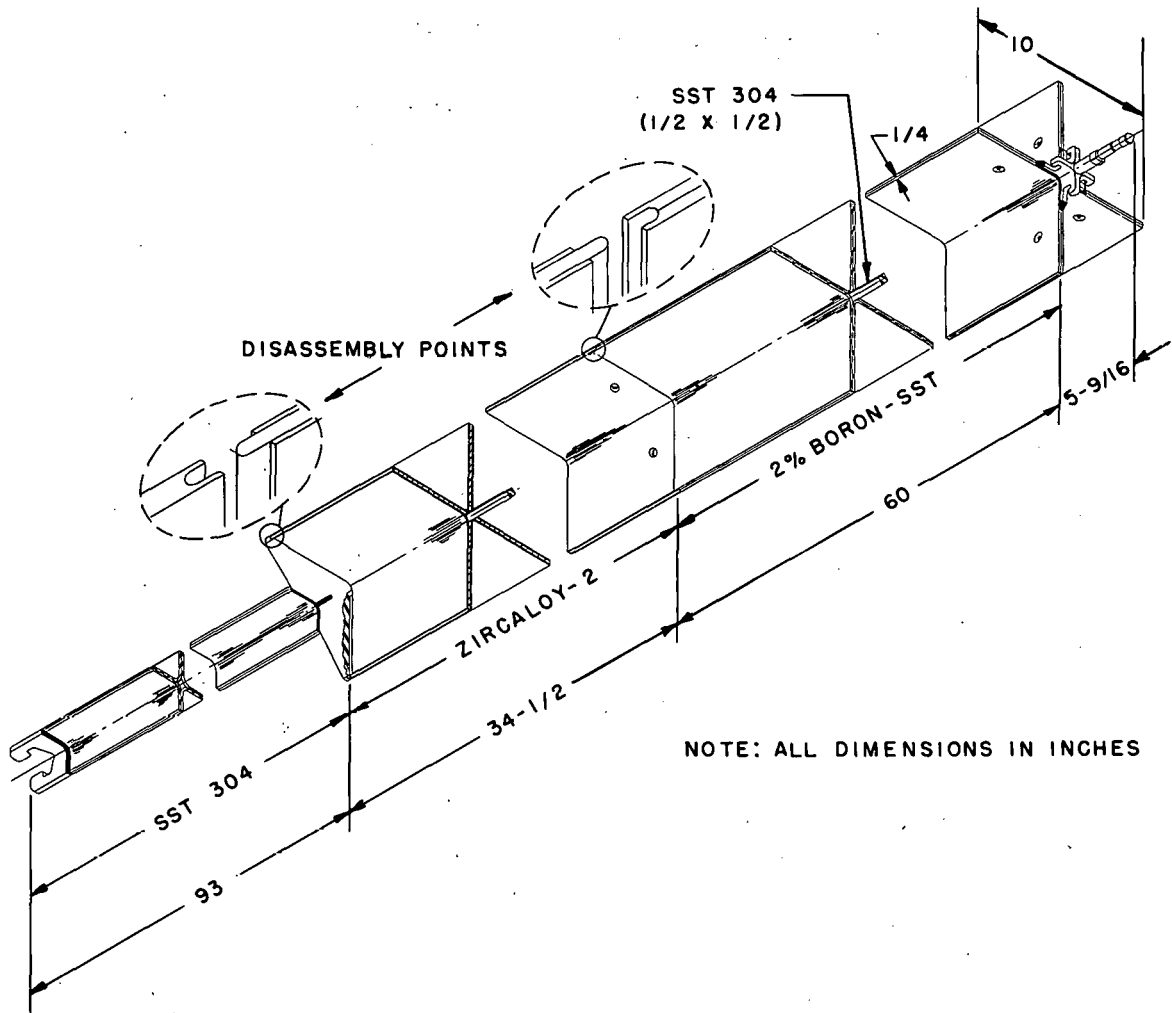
Sectional views of control rod for Plutonium Recycle Core
